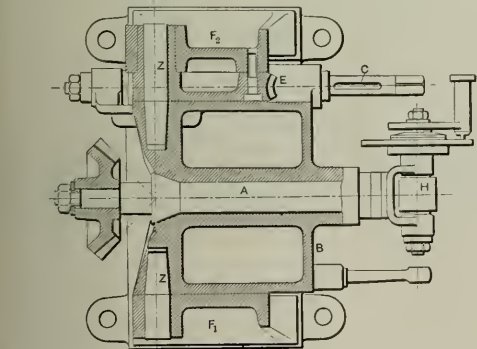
Horizontal Section and Plan of Bevel Gear Shaping Attachment.
